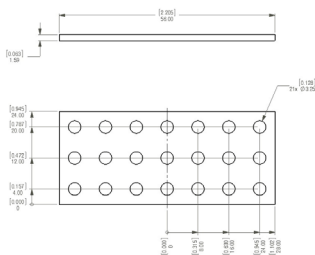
The PPA-5003 tip mass mounting accessory provides a 3x7 grid of M3 mounting holes for mating to the PPA products and adding tip mass in many different configurations. This is water jet cut from aluminum 6061. Dimensions are listed in both millimeters and inches.
